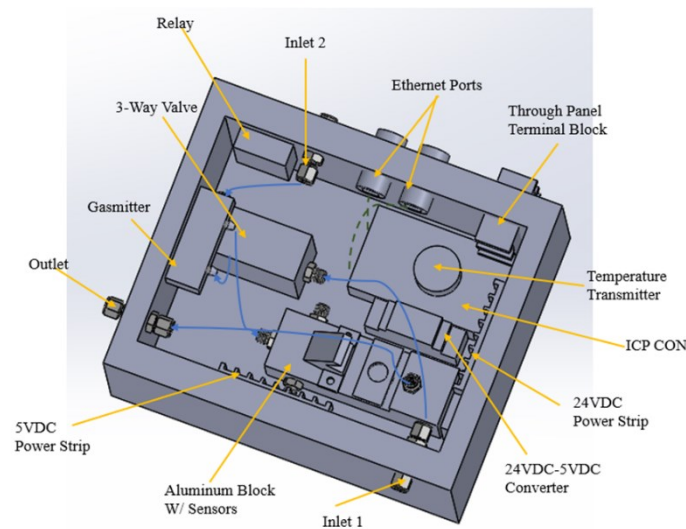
CAD of X/P 5 Internal Dimensions to Enable Electrical Terminals and Relay to be Mounted with the Enclosure Body.
